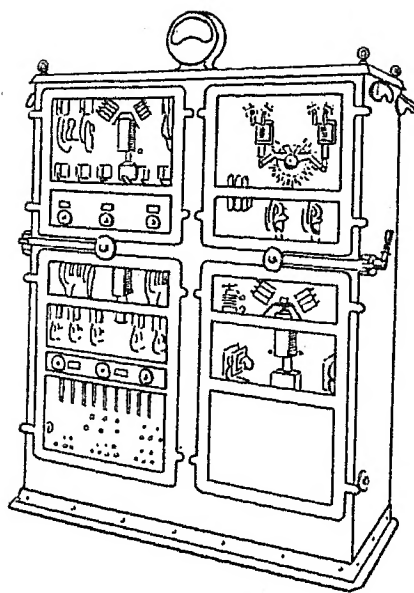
B.—Control gear for wheel lathe, controlling main motor and six auxiliary motors with common isolating switch.
